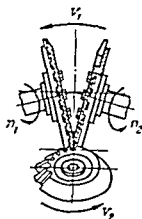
Generating a straight bevel gear with rotating circular cutters
